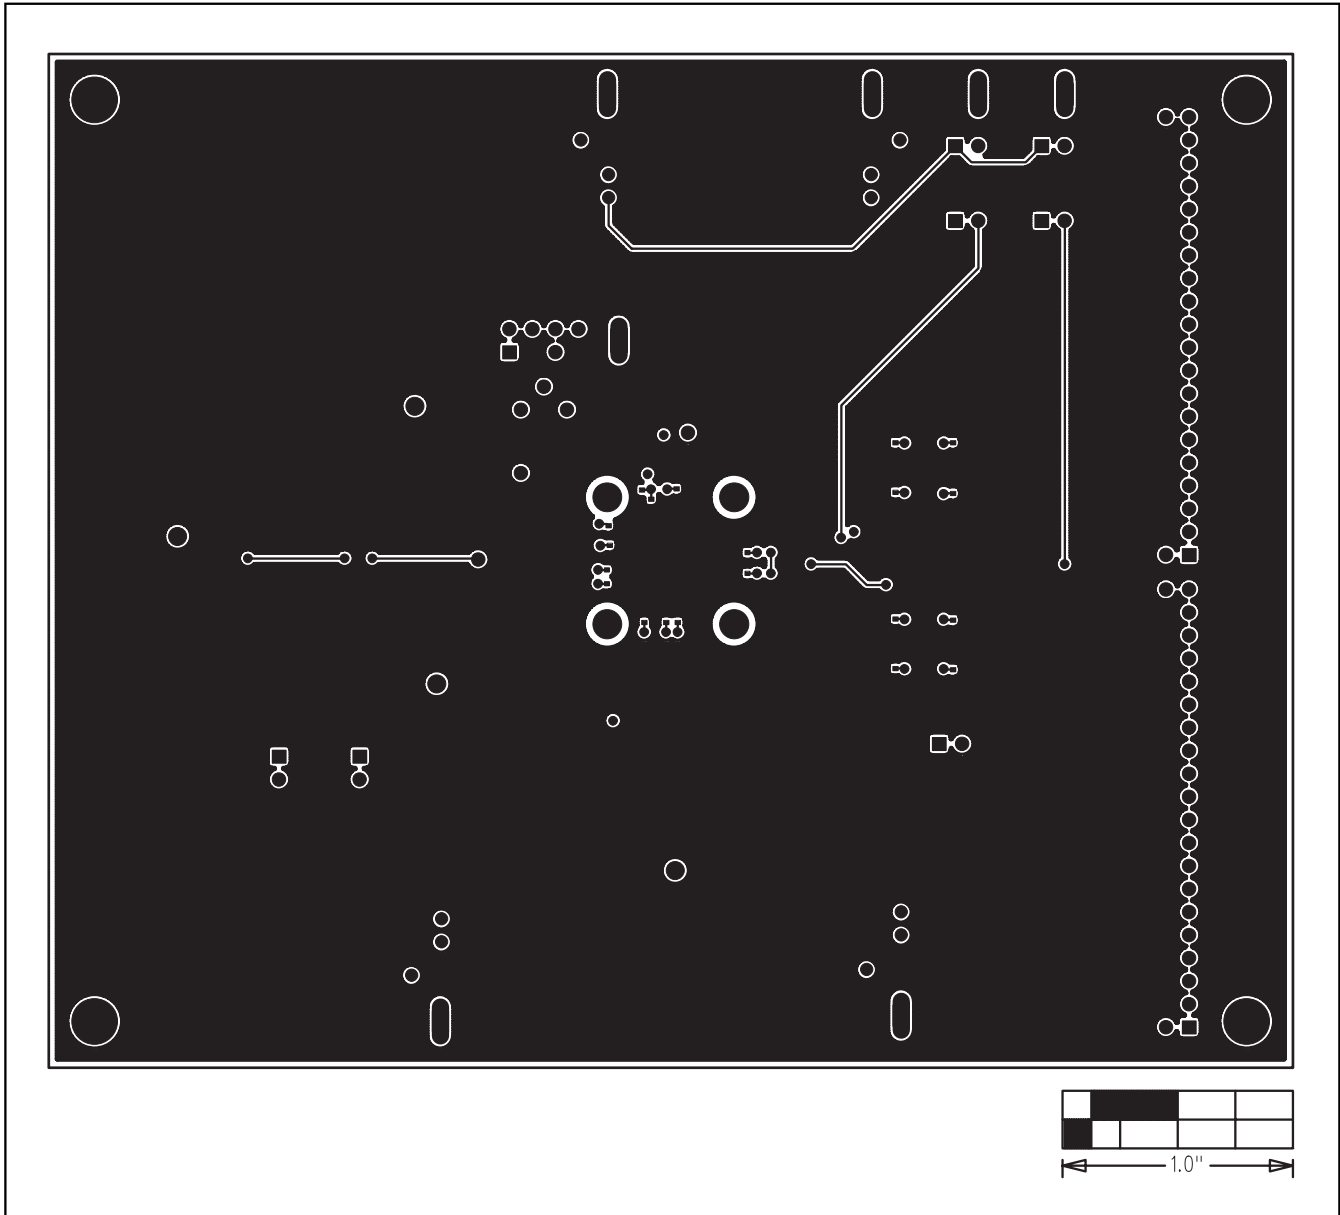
MAX19542 EV Kit PC Board Layout—Solder Side
